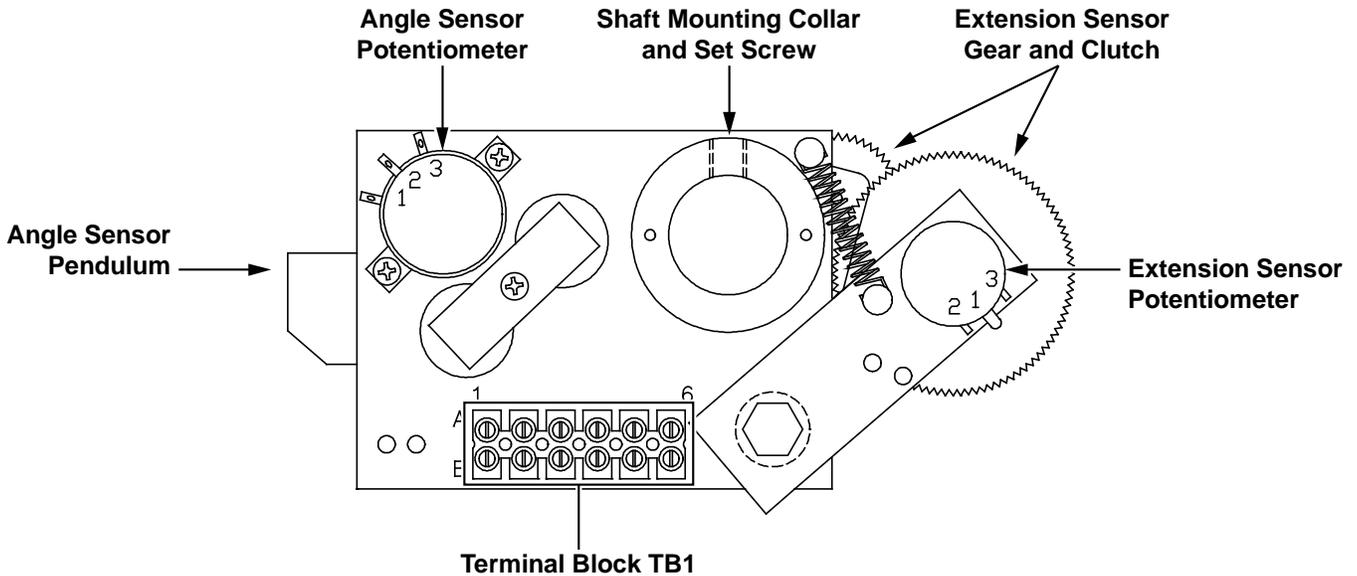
SENSOR BASEPLATE ASSEMBLY
